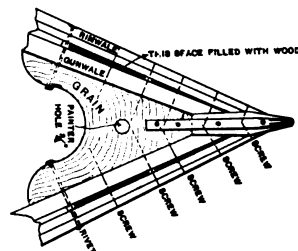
Hood Boards.—Scale, 6 Inches to the Foot.
